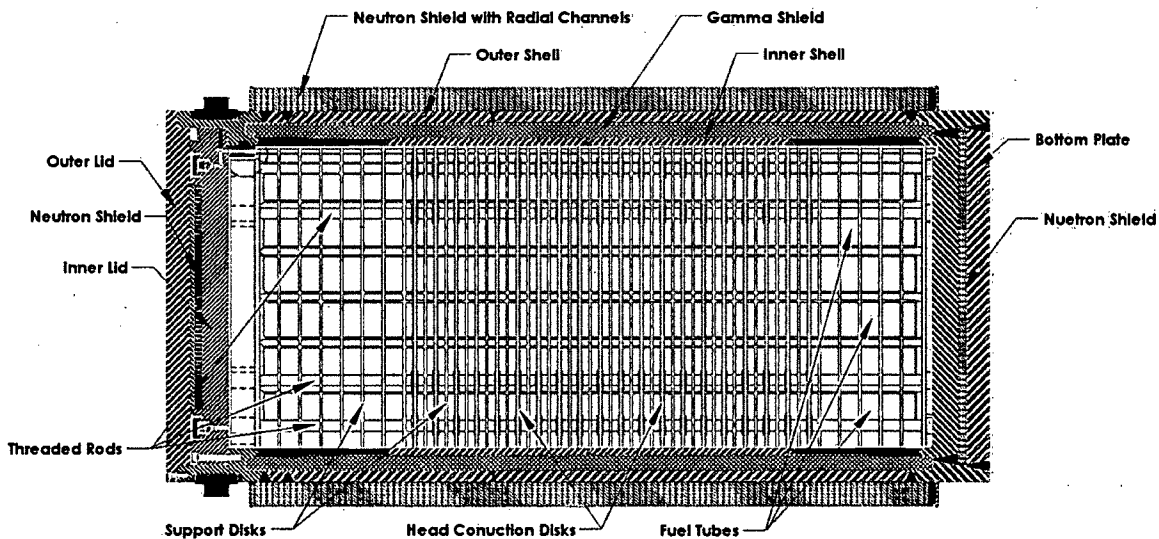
Cross-section view of the Rail-Lead cask with the directly loaded fuel basket
